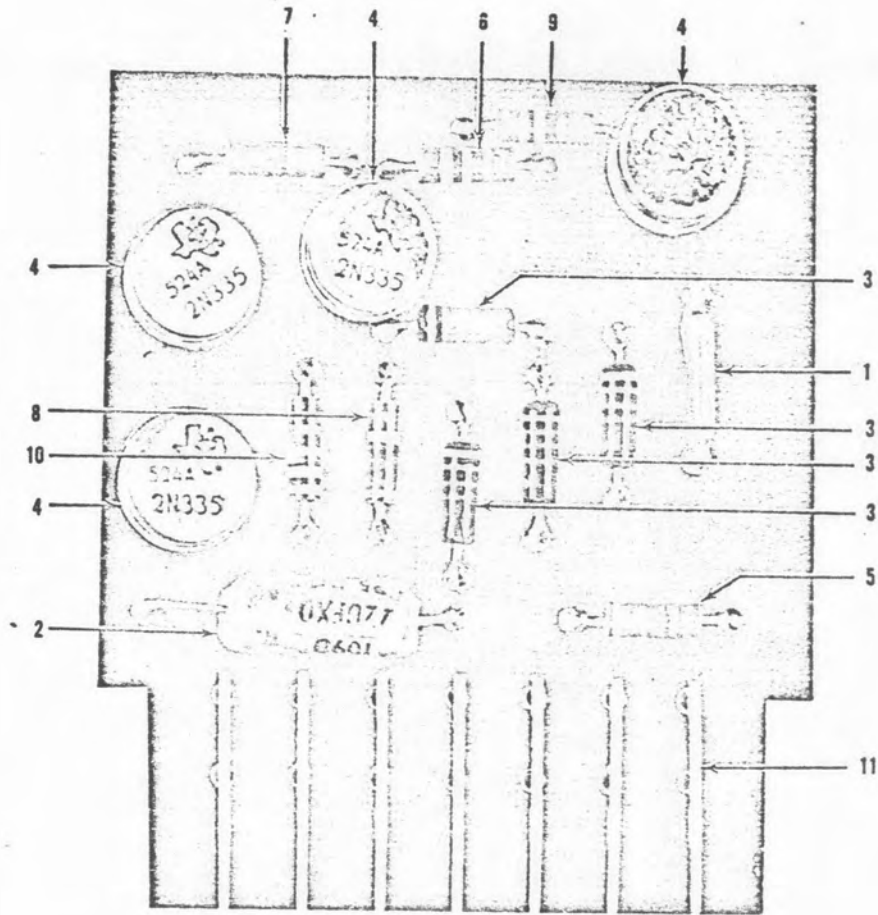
Board Assembly Courtesy of <http://BlackRadios.terry.org>
